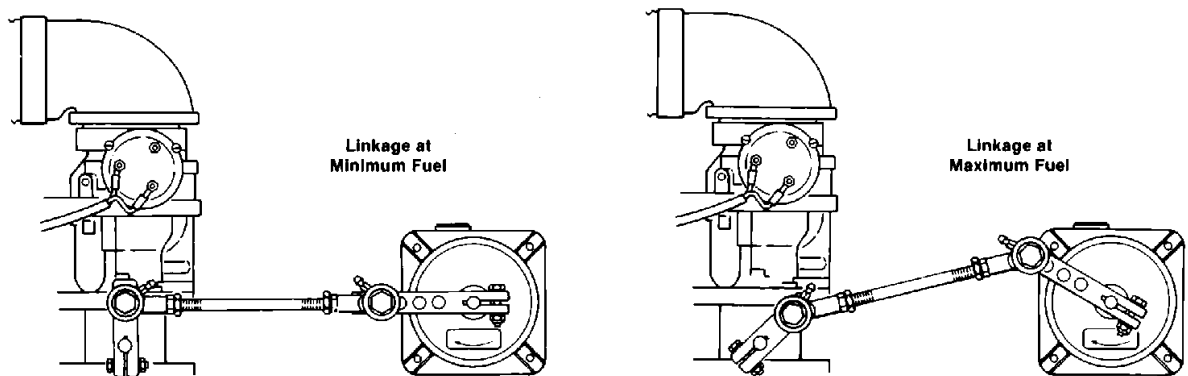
Butterfly Valve Non-linear Linkage Arrangement
